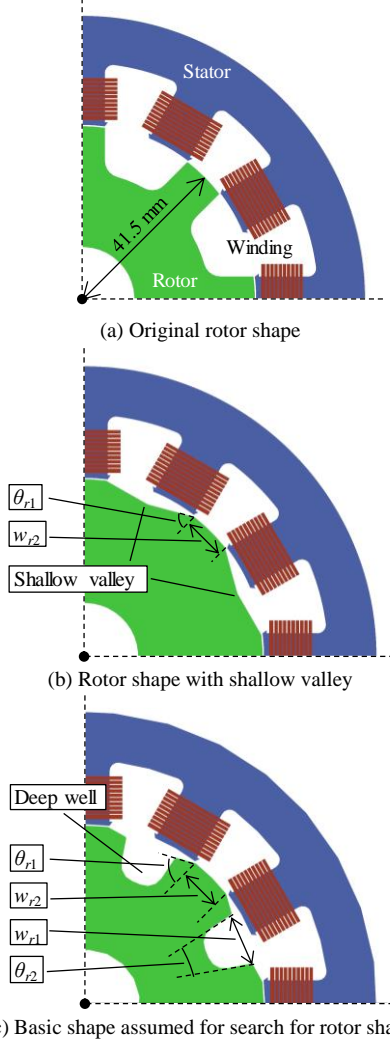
Basic rotor shape and parameters used for rotor shape searching process.
